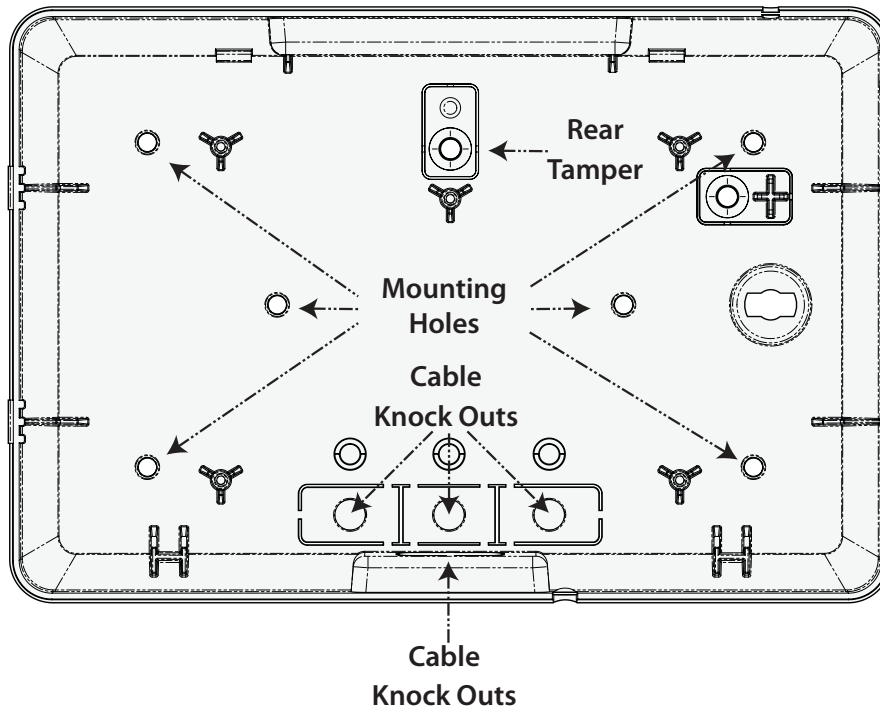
Mounting Holes, Cable Knock Out's & Rear Tamper Locations
